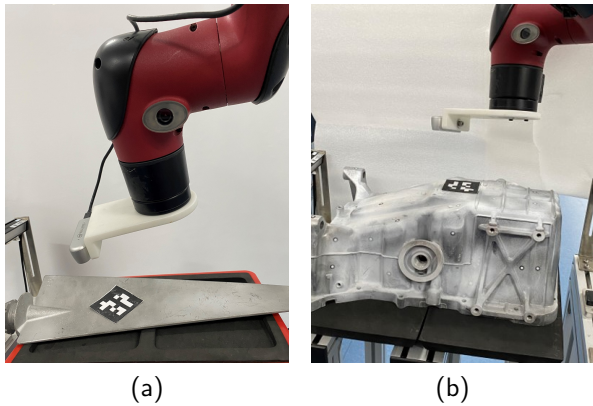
Real scenarios of visual servoing applications. (a) Engine blade assembly. (b) Engine cylinder assembly.
